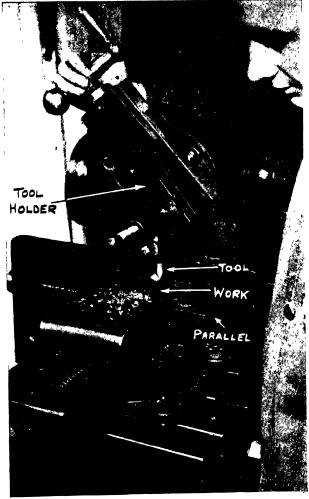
CUTTING OF A V-GROOVE ON A SHAPING MACHINE
